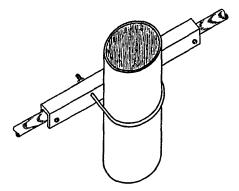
Another method of mounting the beam elements. Aluminum channel brackets and "U" holts are used in a neat and rigid assembly. (W5KQD).
